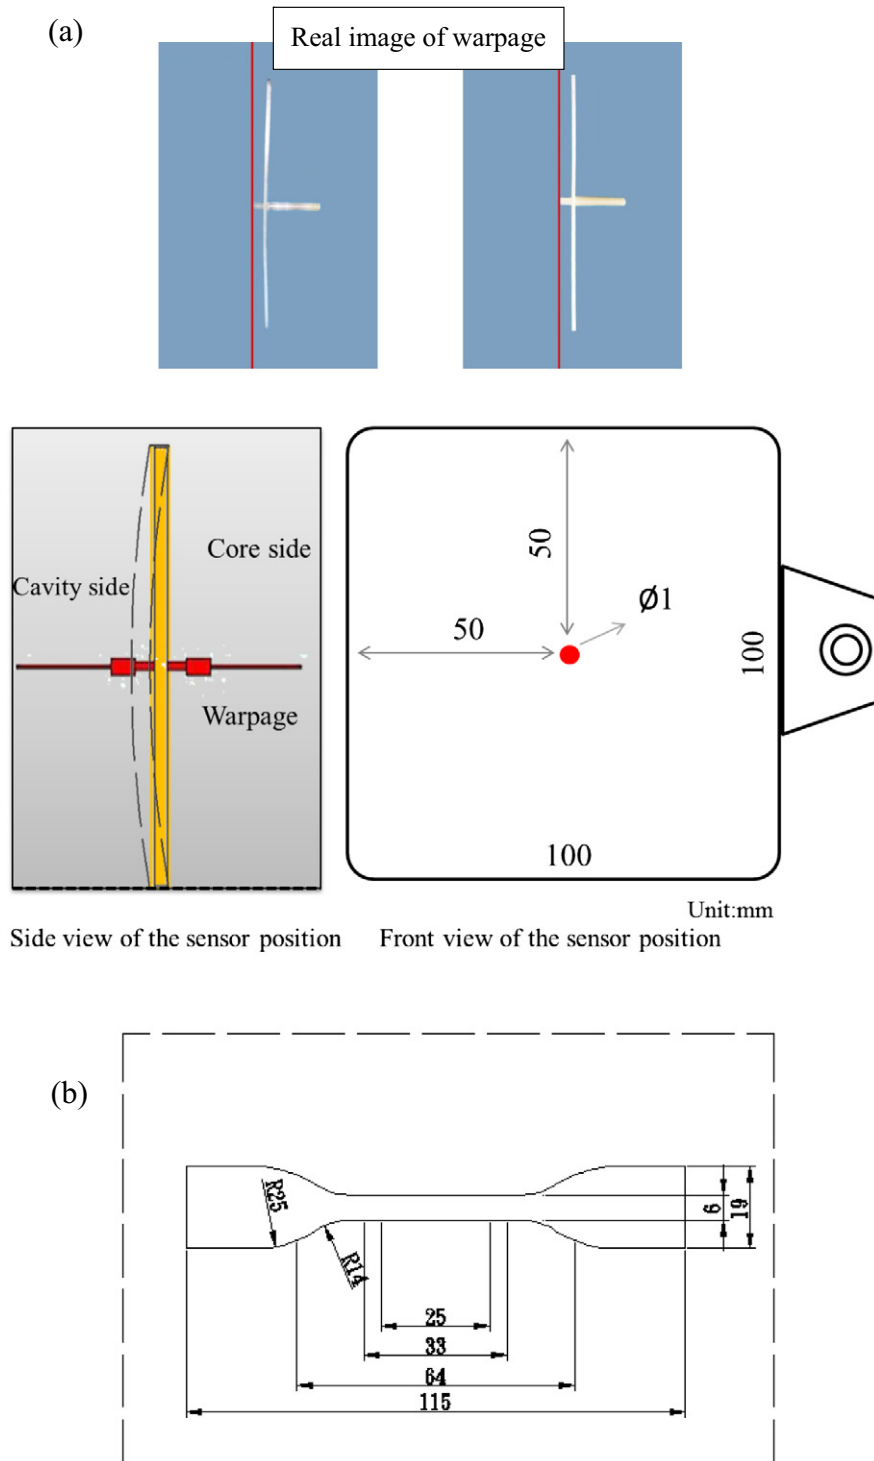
Schematic of molding part's geometry. (a) Definition of warpage is also identified. (b) Specimen dimensions for tensile strength.
